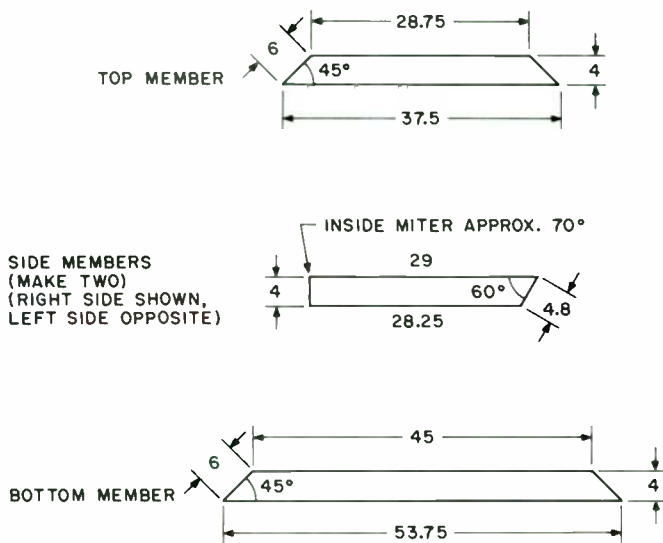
Cutting guide for the escutcheon, which projects 2½ inches from the front edge of the woofer cabinet and carries the woofer baffle forward.
